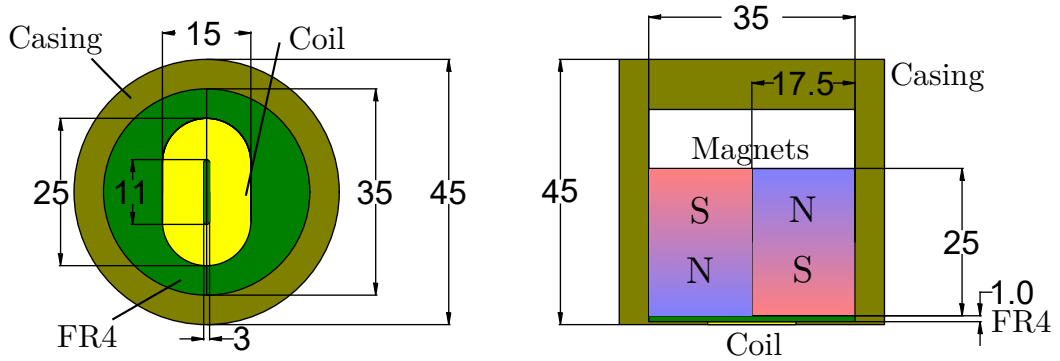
Bulk shear wave racetrack coil EMAT design using twin magnets and PCB electric shield. The coil has 40 turns and is wound with 0.15 mm diameter copper wire. All dimensions are in mm.
